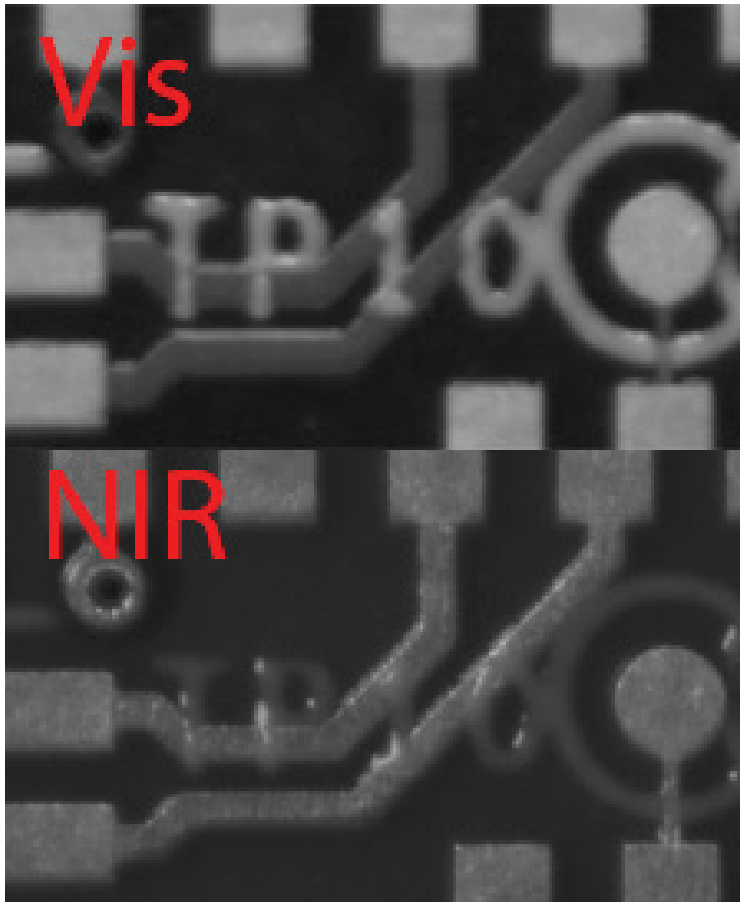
Inspection of Buried Trace on PCB with NIR Light
